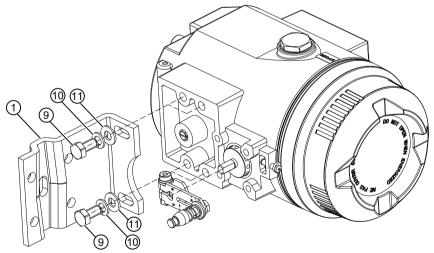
Installation with mounting bracket, flameproof enclosure
